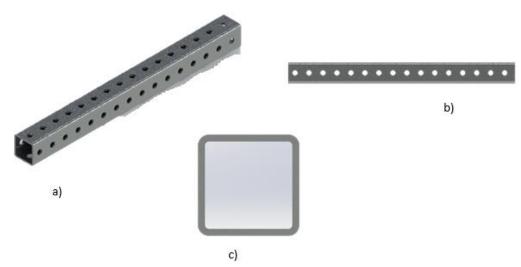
Heavy duty steel bolt-together framing for the vertical support: a) isometric view, b) right plane view, c) front view.
